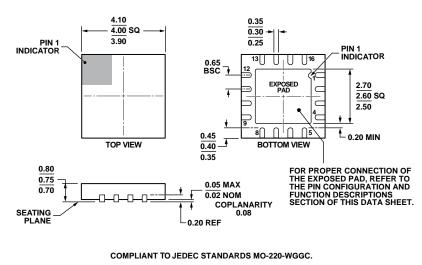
16-Lead Lead Frame Chip Scale Package [LFCSP\_WQ] 4 mm × 4 mm Body, Very Very Thin Quad (CP-16-17) Dimensions shown in millimeters
